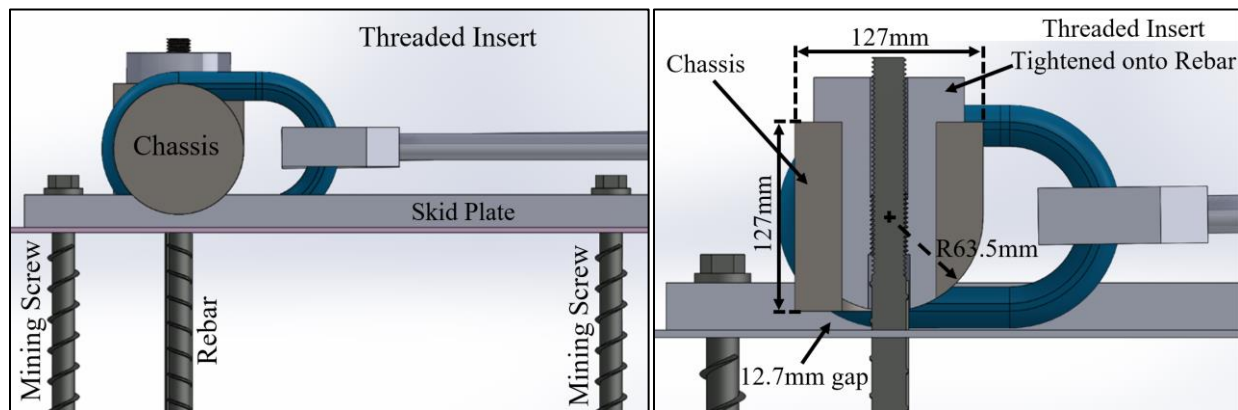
Cross-sectional view of chassis and threaded insert tightened onto rebar
